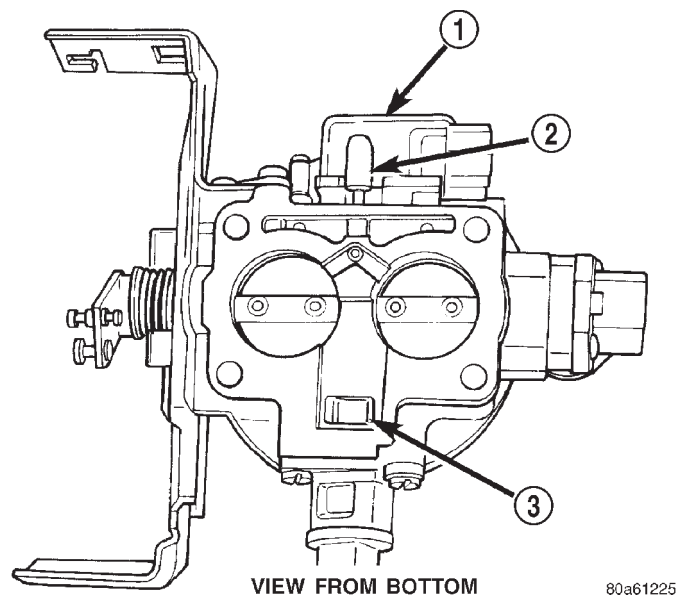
MAP Sensor L-Shaped Rubber Fitting—3.9/5.2/5.9L Engines
